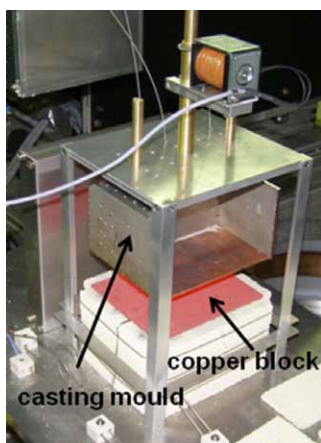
Red-hot copper block with the release system for the casting mould (14 cm in width, 12 cm in depth).
